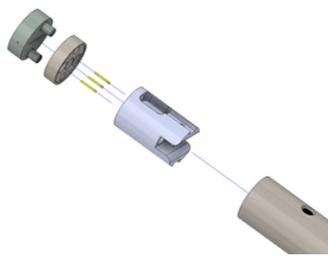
Detail of the probe – flexible design. Interchangeable collimator, pins holder, scintillation pins, optical fibre mount and manipulator mount.
